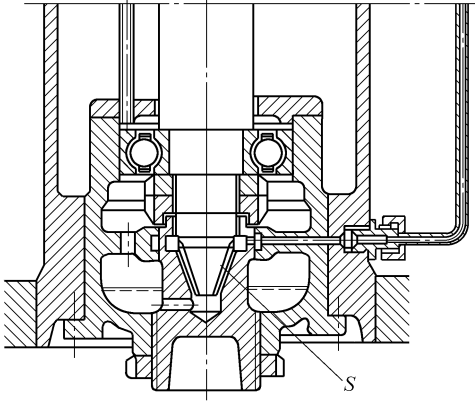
22 Spindle tapered shape crack transporting oil
